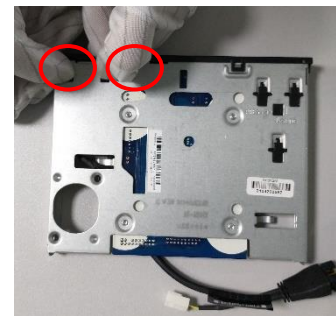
Loose the 4pcs switch card PCA screws and remove the switch card PCA.
